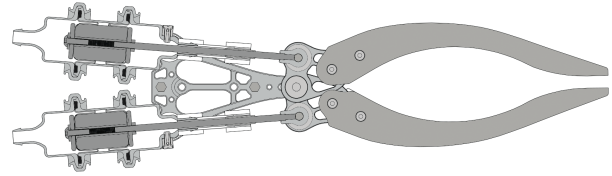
Cross section diagram of gripper mechanism, highlighting the symmetric 4-bar mechanism and connections between the cylinder rod ends and finger mounting plates.
